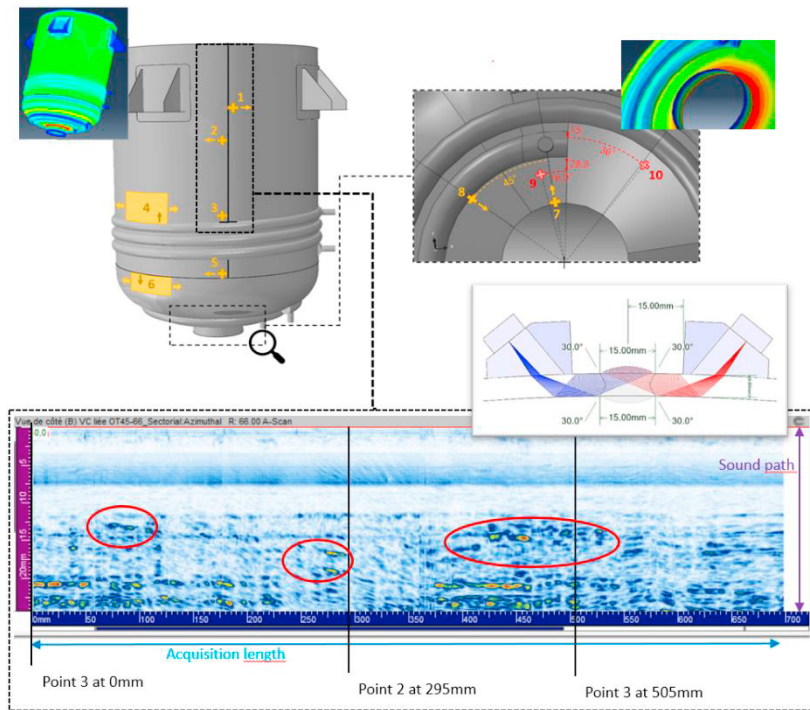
Identification of inspection areas and results of longitudinal weld inspection
